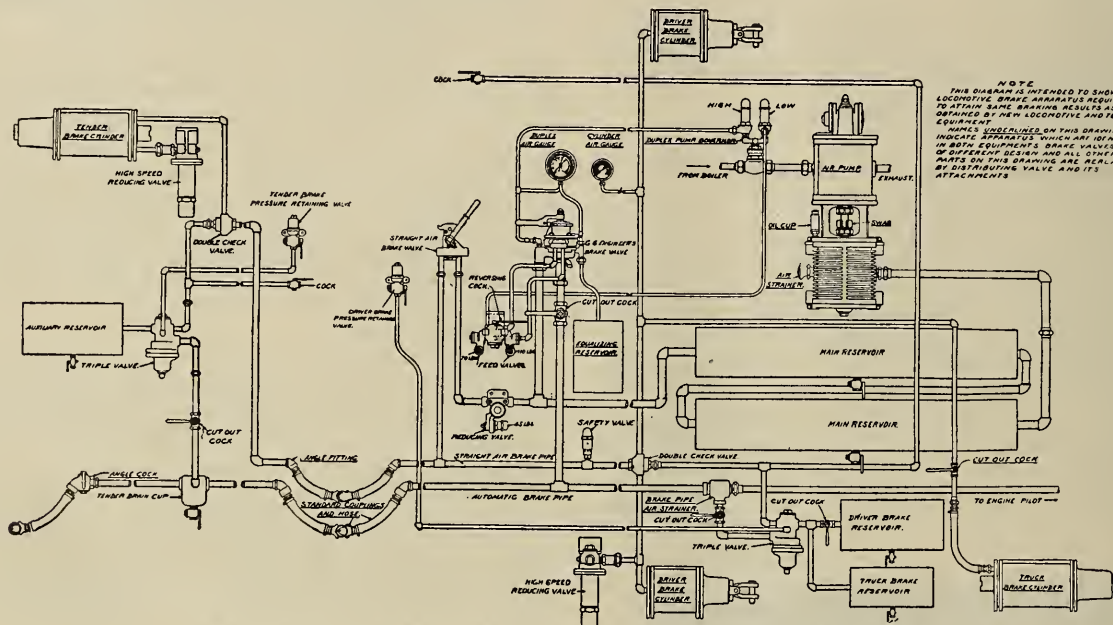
Locomotive Brake Equipment, Combined Automatic and Straight Air.
